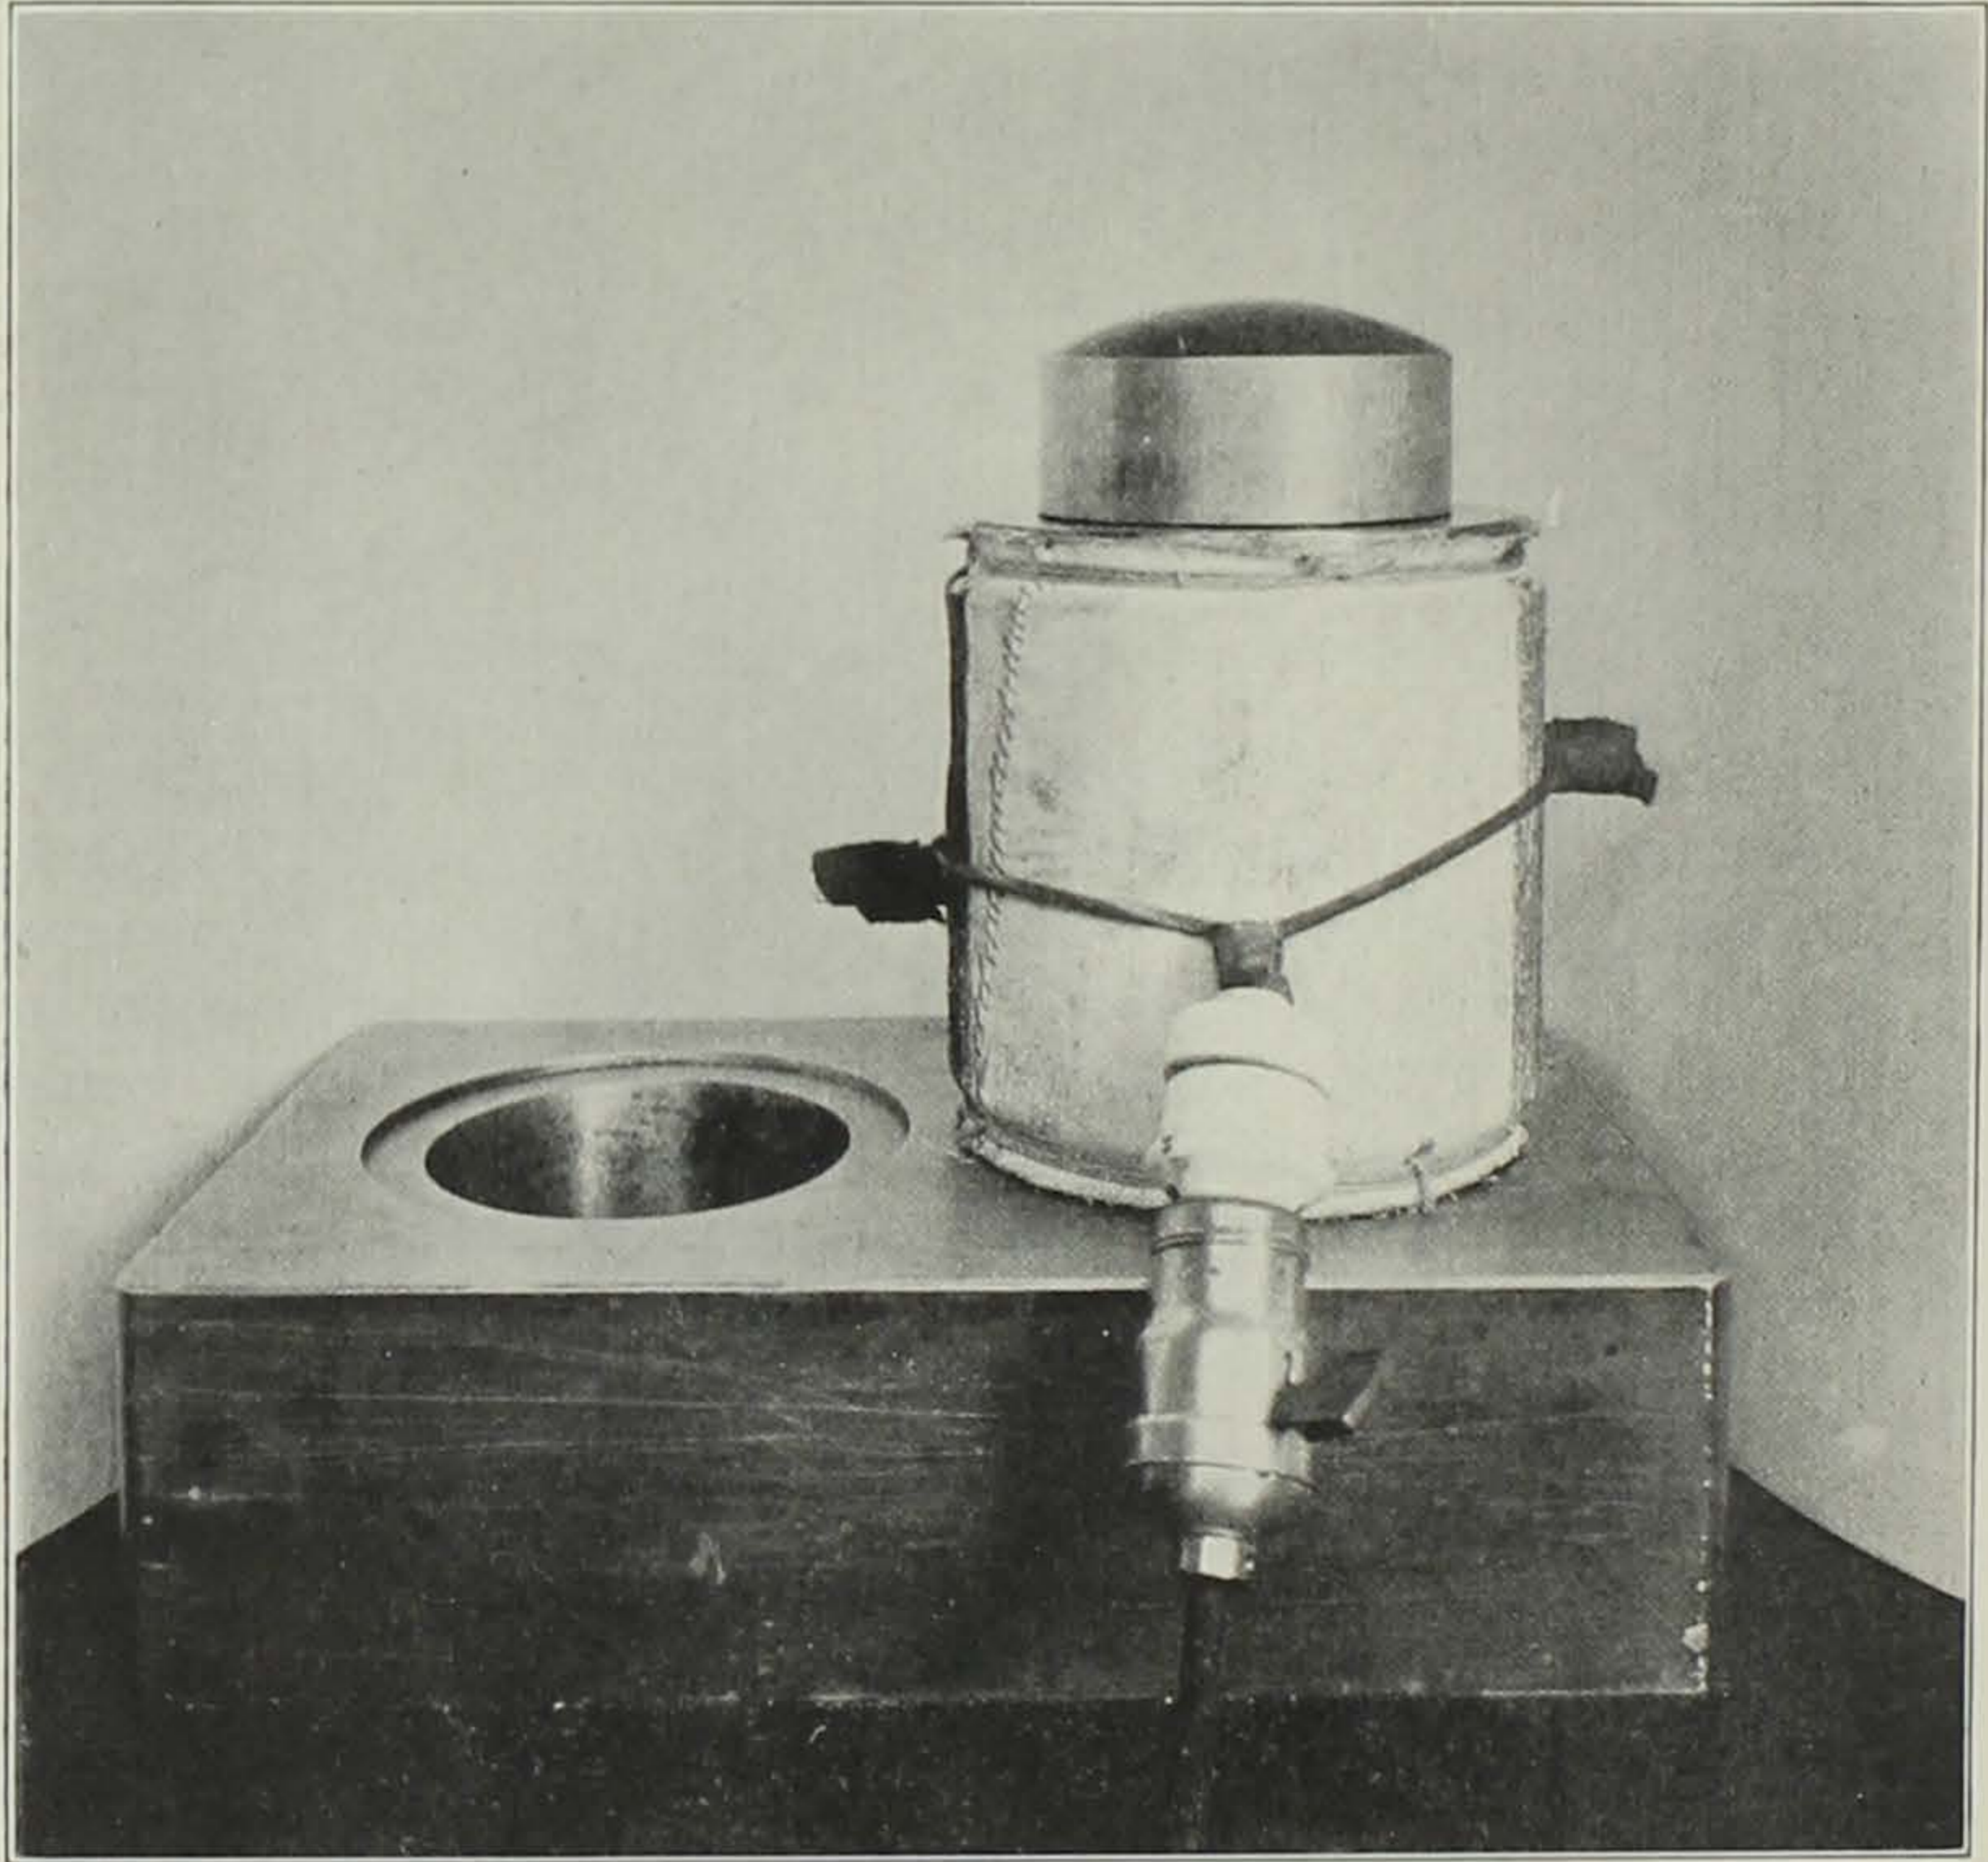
ELECTRICALLY HEATED STEEL MOLD WITH INSULATION
